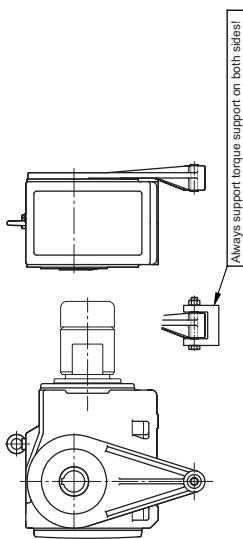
Attaching the torque support on bevel gear and worm gear units
